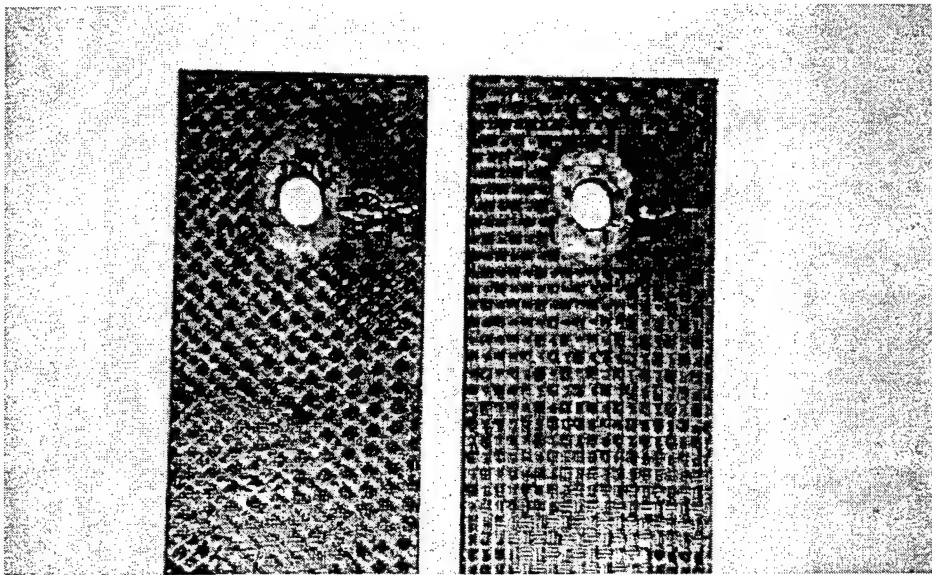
Fatigue Failure Mode of Active Bearing Specimens (Both Lay-ups)
